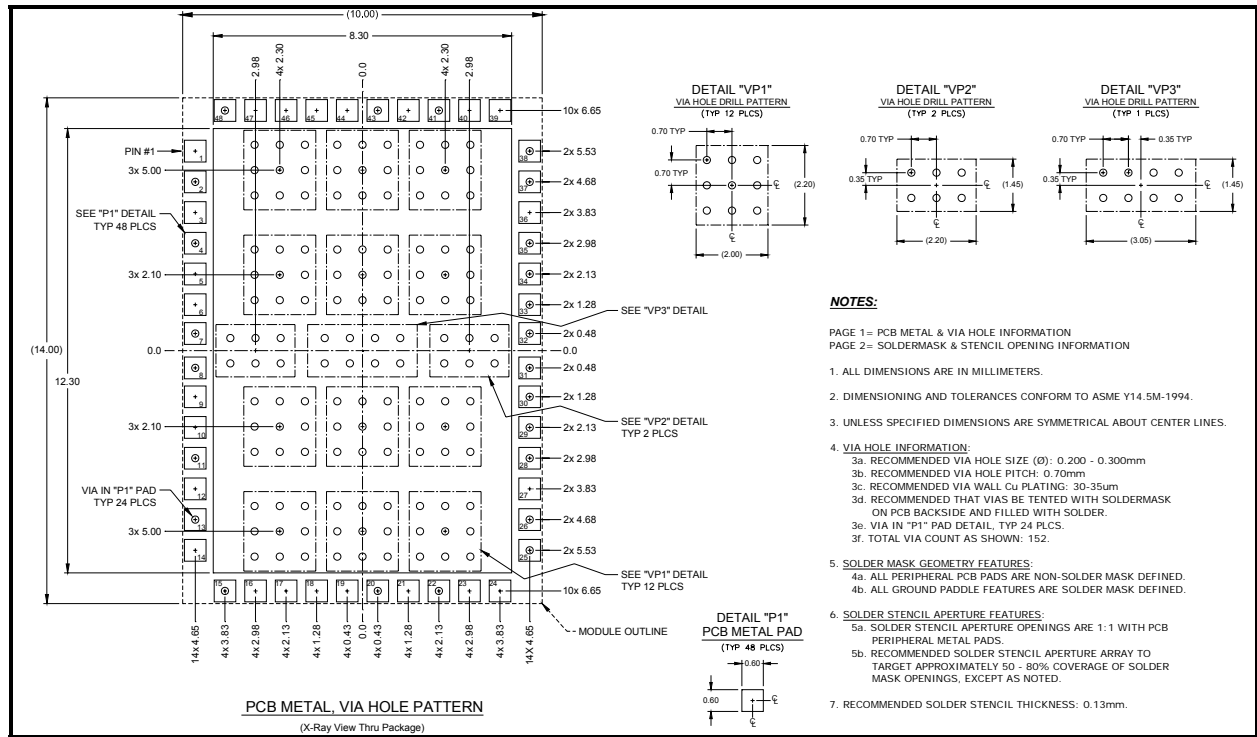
Recommended PCB Footprint – PCB Metal, Via Hole Pattern (173-DWG-10, Rev 1.0)
